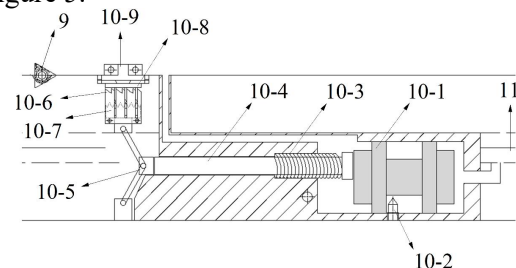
Schematic Illustration of the Thrust Tool Starting Position
